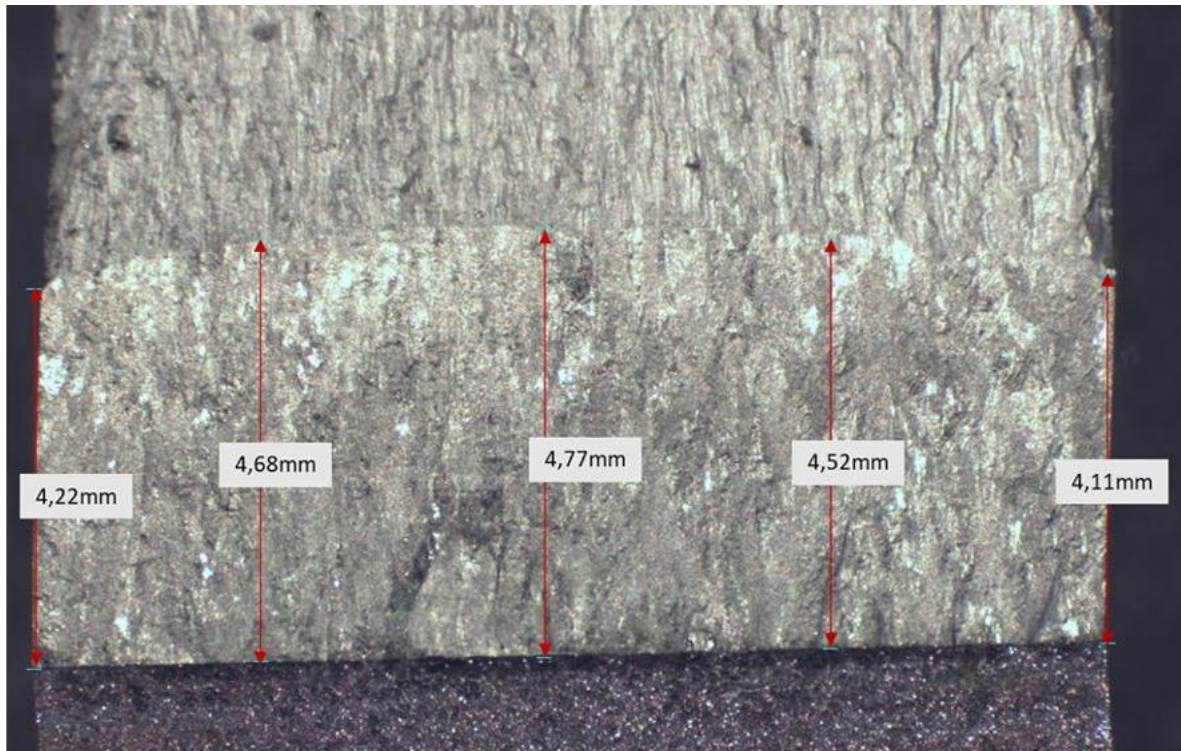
Fracture toughness crack measurement for 6.0 m/s 1
